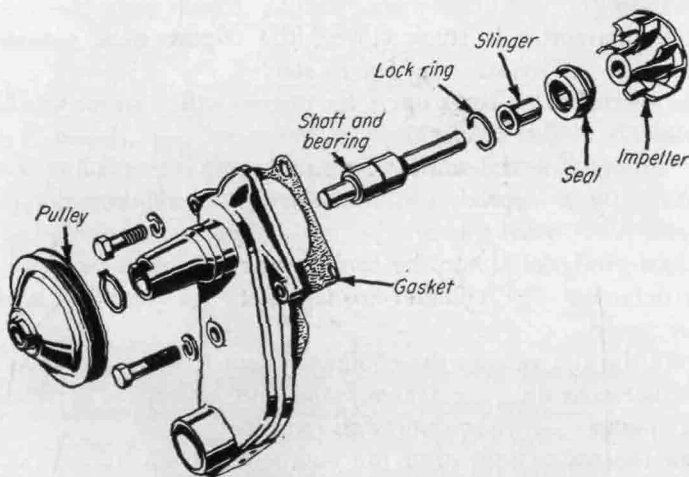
Disassembled view of water pump. (Ford Motor Company)
